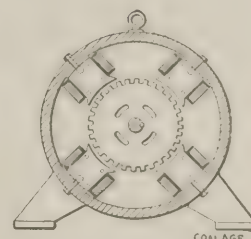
SECTIONAL VIEW OF D. C. MOTOR
